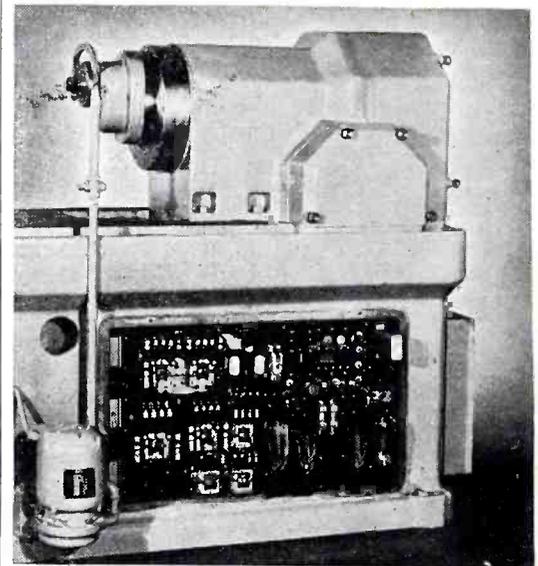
Back of milling machine, showing panel containing all electronic equipment with protective cover removed
